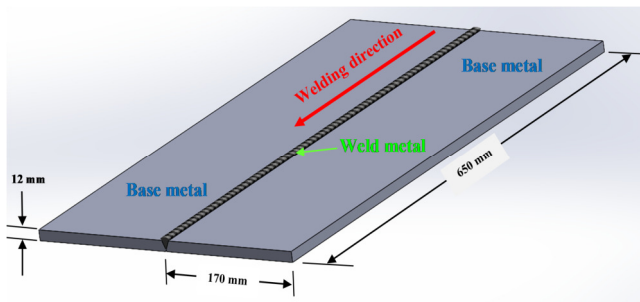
Three-dimensional model of the EH36 steel butt-weld joint.
